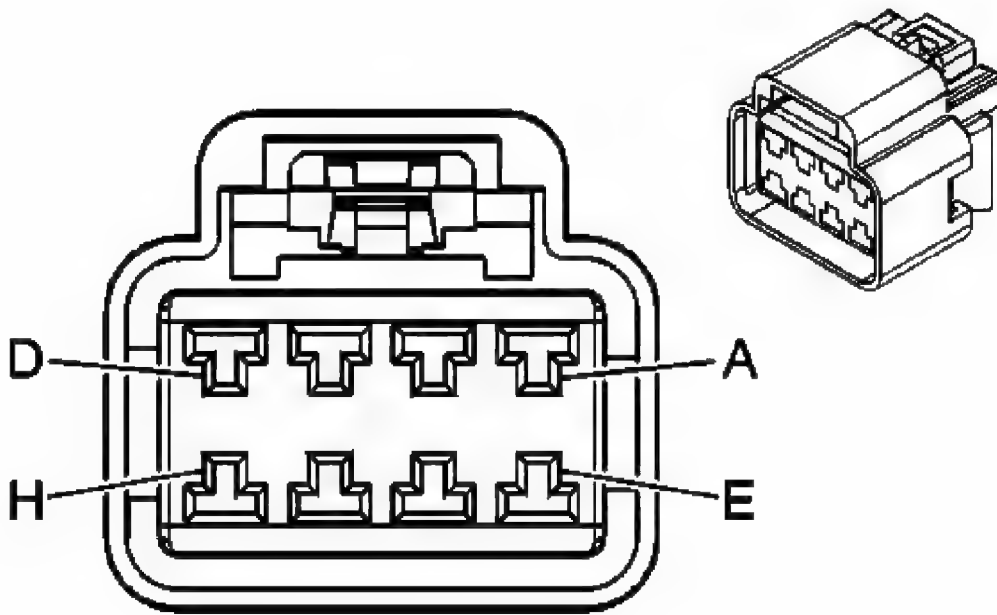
Driver Seat Adjuster Window Switch (AE8) Connector End View
